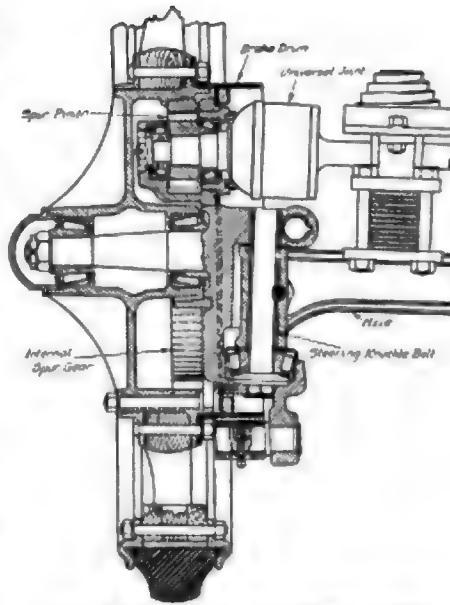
Layout of front-wheel driving mechanism of a quad drive truck. The universal conducts drive to a pinion operating an internal gear
